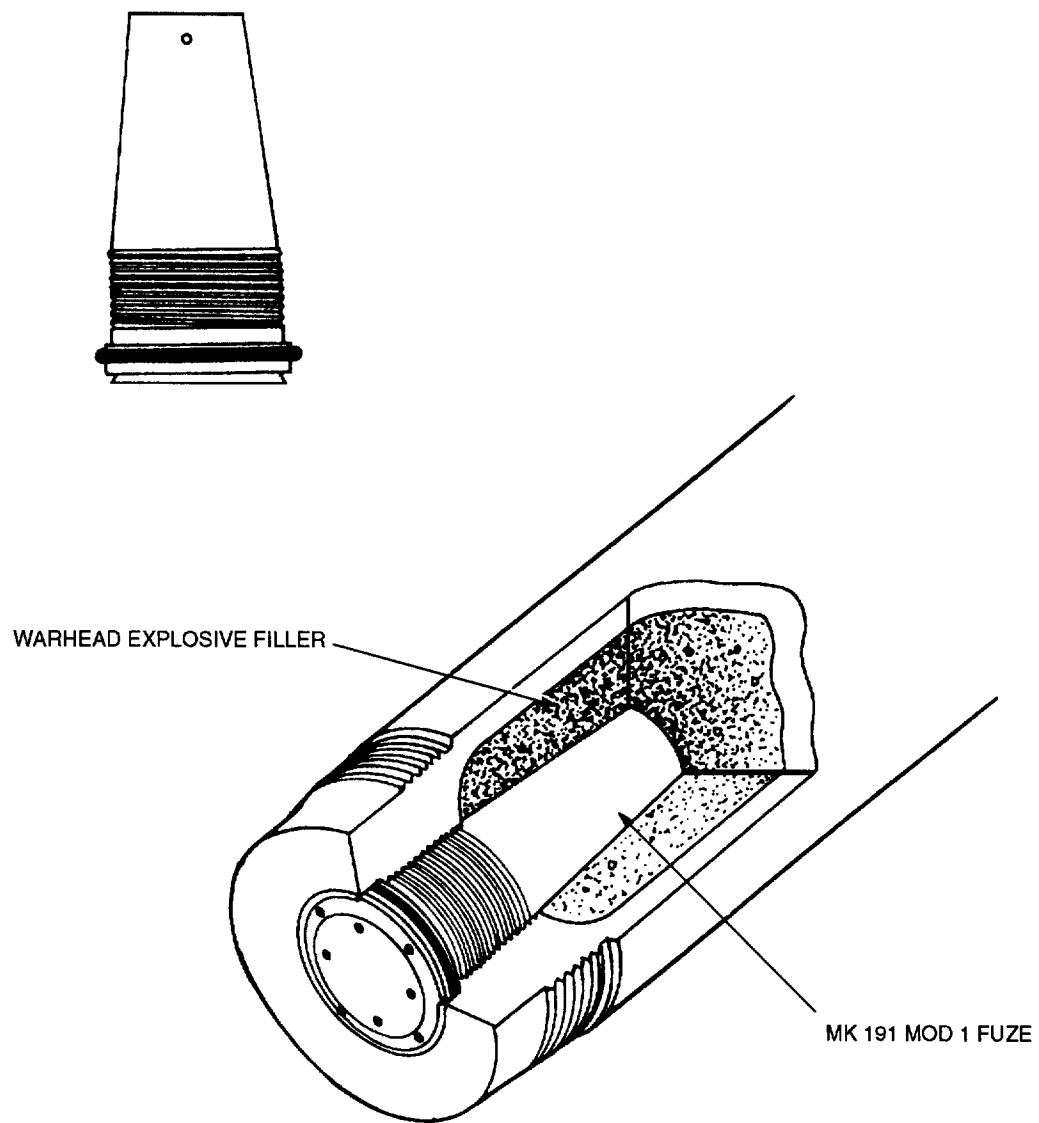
Fuze, Rocket, MK 191 MOD 1 - External View and Warhead Mounting
